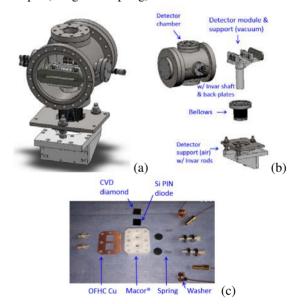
(a) Detector assembly, (b) its exploded view (c) detector module with a plunger spring.
